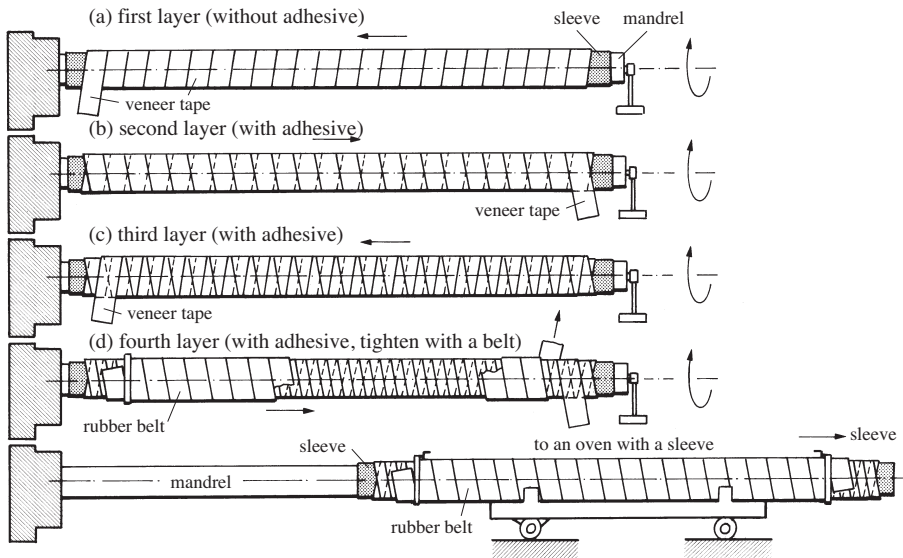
Veneer tapes used in the manufacture of cylindrical LVL.
